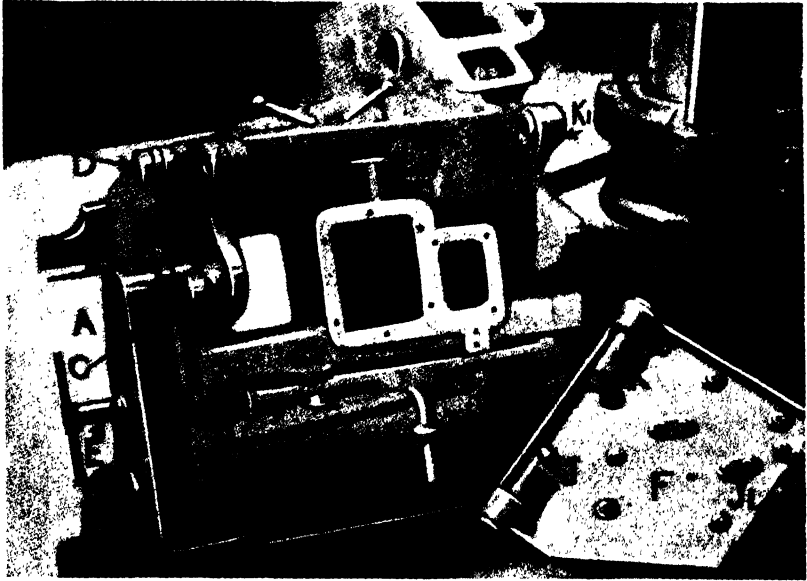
DRILL JIG FOR AUTOMOBILE GEAR BOXES INDEXING IN 4 PLANES.
